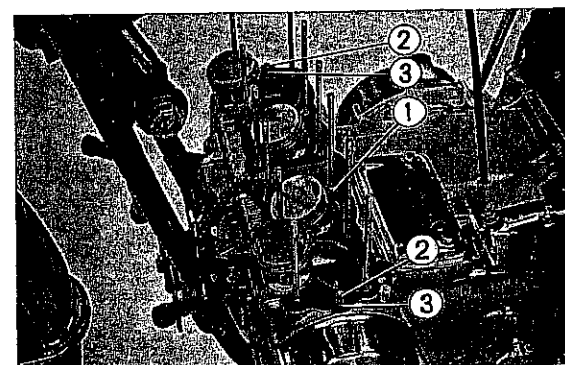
① Cylinder gasket ② Dowel pins ③ O-rings
